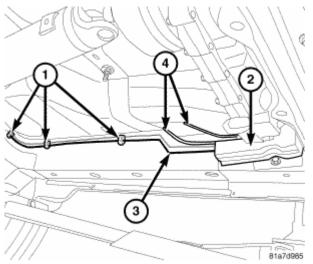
Identifying Bracket, Brake Hose/Line, Fuel Line Bundle & Retainers Courtesy of CHRYSLER LLC
